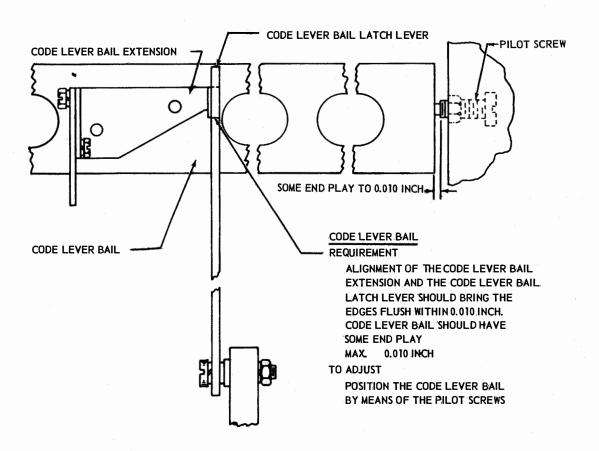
KEYBOARD, CODE BAR MECHANISM, FRONT VIEW
